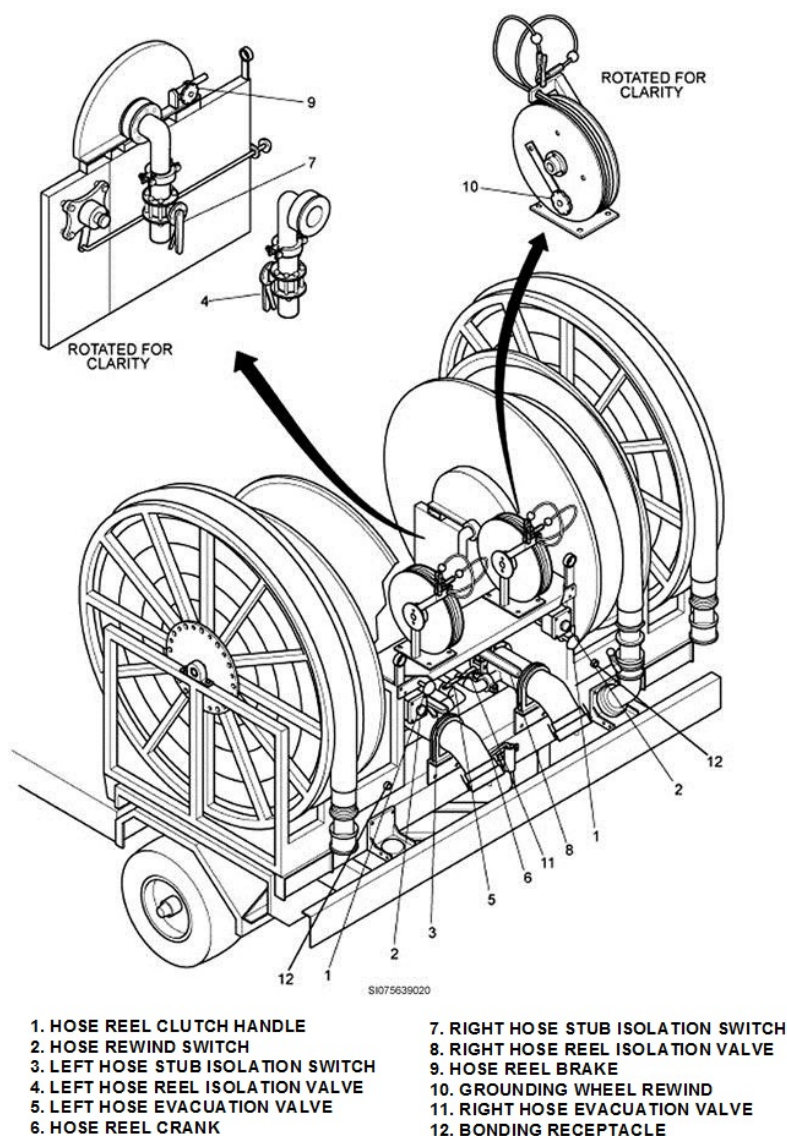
R-20 multi-aircraft servicing platform additional components.
